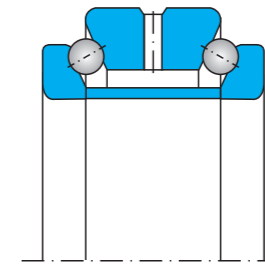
ZYS Double-direction angular contact thrust ball bearings
